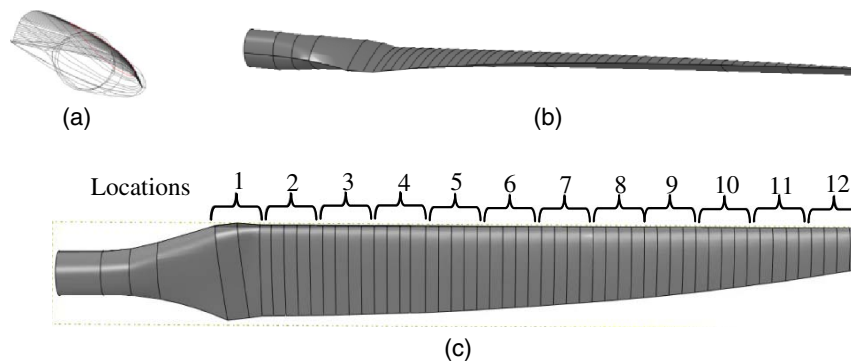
Geometry configuration of the turbine blade: (a) side view locations, (b) front view, and (c) top view
